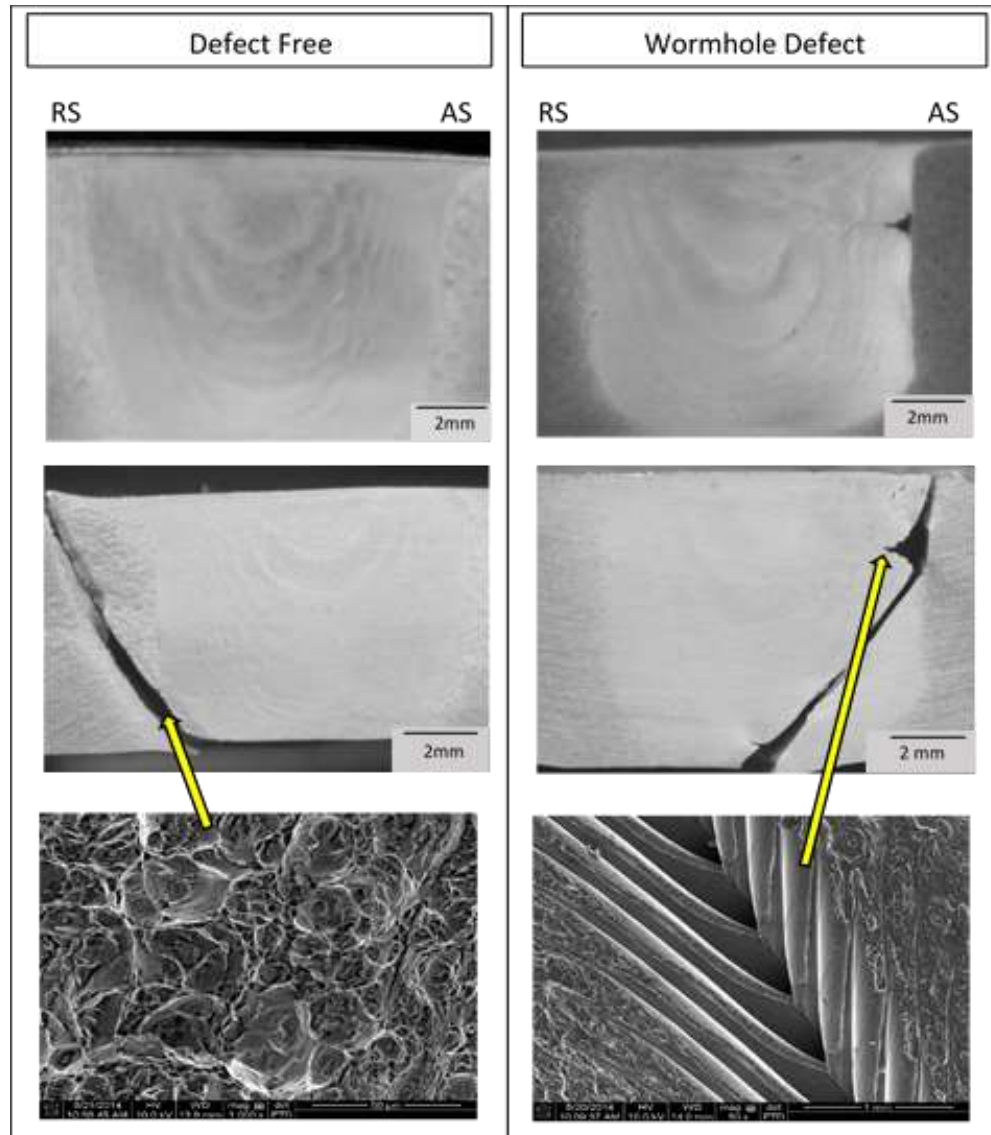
Optical micrographs of cross-section and fracture specimen of a defect free and defective specimen with WH and IP. SEM images illustrate large fracture dimples indicating larger grains outside of SZ and internal structure of wormhole defect showing regions of bonded (dimples) and un-bonded (surface ripples) material.
